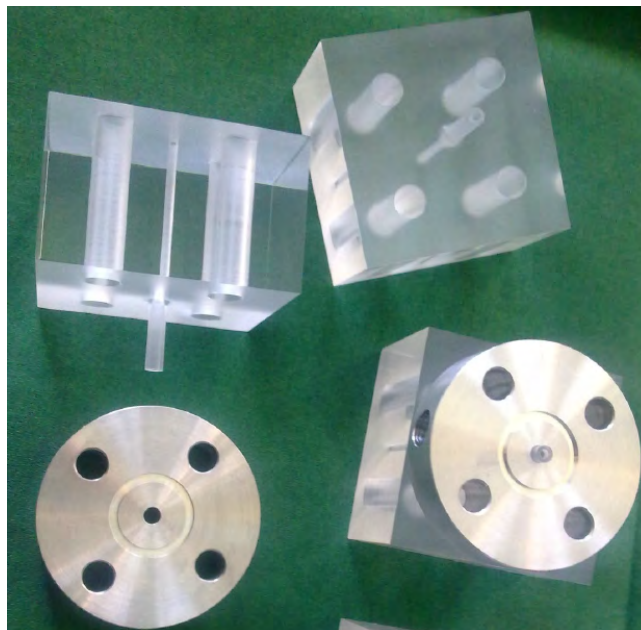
Final design of the critical pieces between the hot bath and the measuring section: two views of the same plexiglass piece, and two views of the metallic piece, unassembled and assembled to the plexiglass one.
